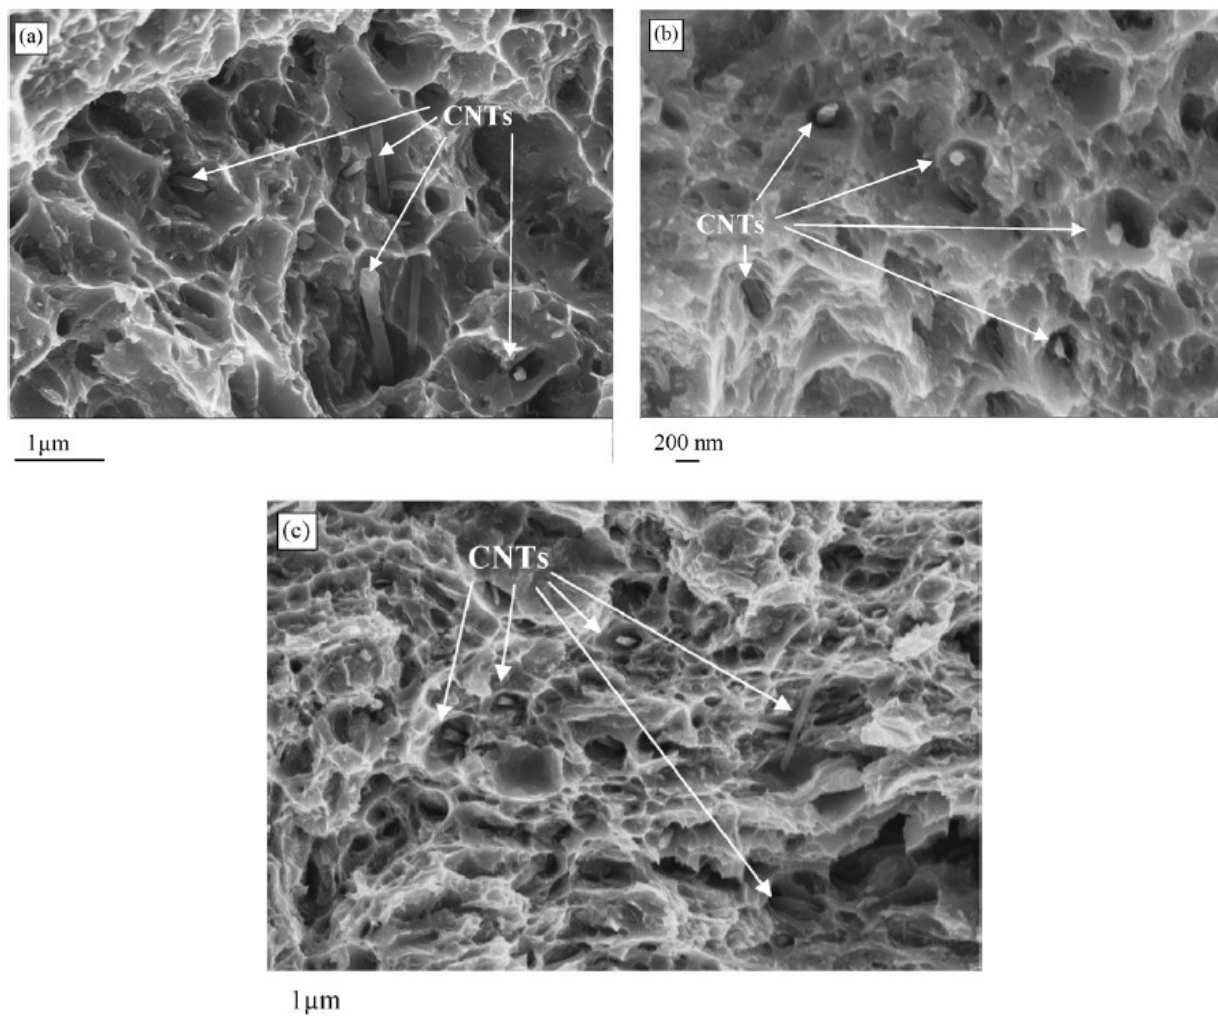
5 Fracture surfaces of 2wt.% Al-CNT sample showing individual CNTs dispersed in the matrix (a) un-annealed ball milled for 6hrs (b) annealed at 500°C ball milled for 6hrs, (c) annealed at 500°C ball milled for 3hrs. [52]
